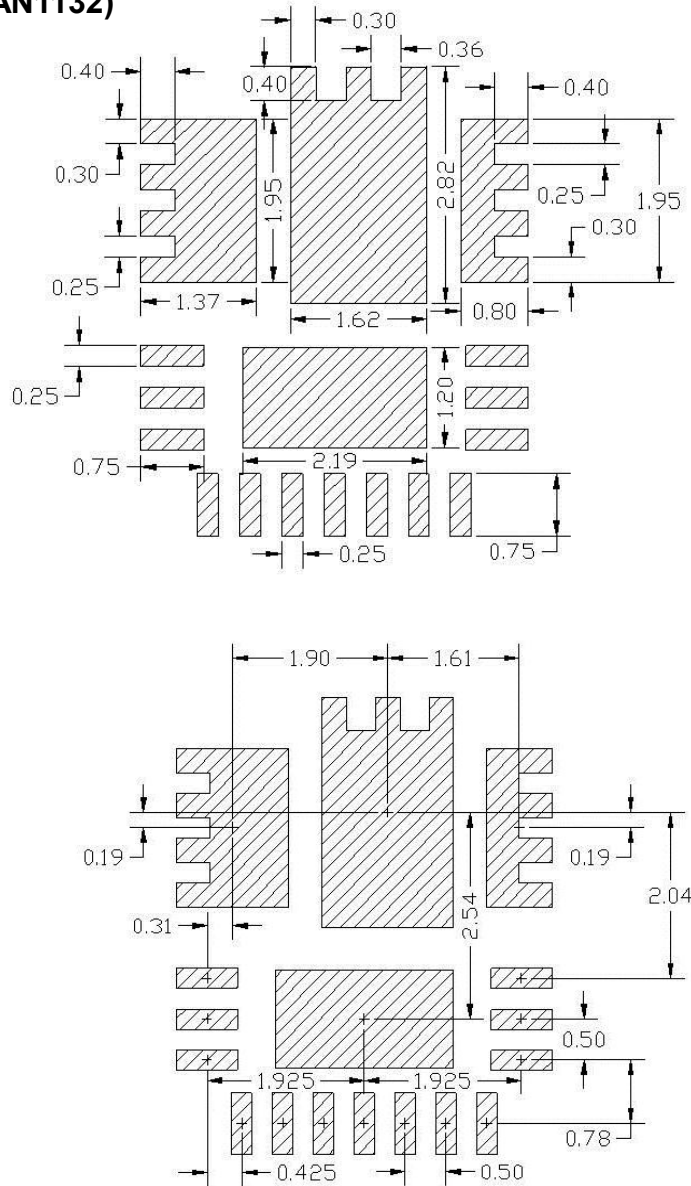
PCB Metal Pad Spacing (all dimensions in mm)
